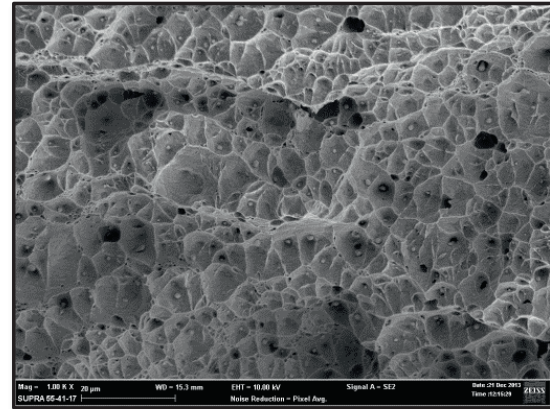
Typical morphology on the fracture surface of 316 stainless steel welded joint achieved by FESEM – EDX – mag 1000x – current
